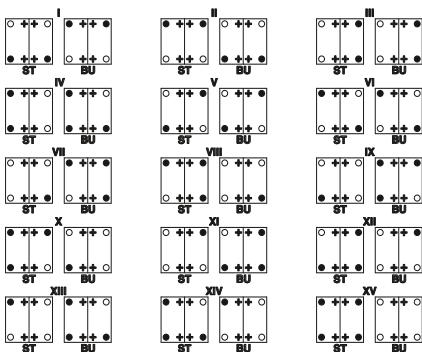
Coding with coding pins and sockets for housing with two contact inserts
